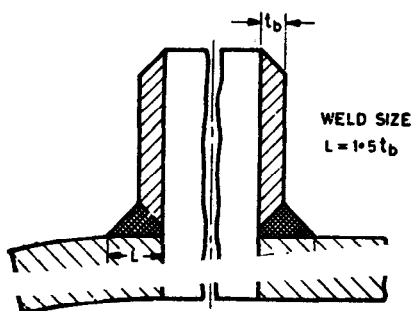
WELDED BRANCH FOR FLANGED NECK
